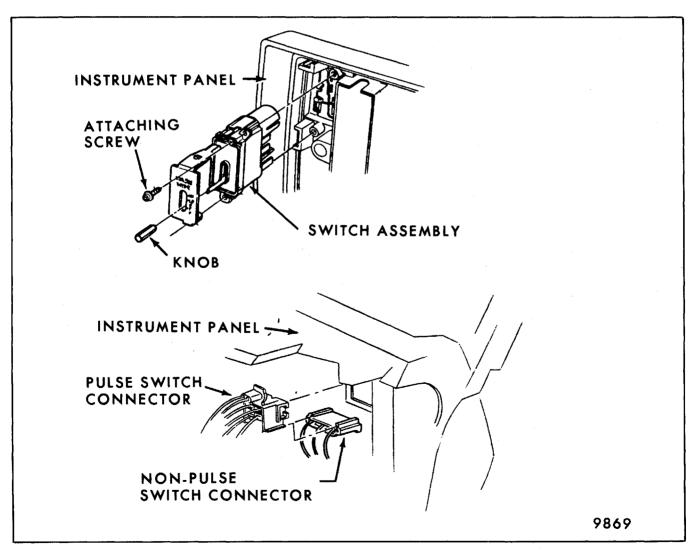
Windshield Wiper Switch Installation - Buick A Styles
